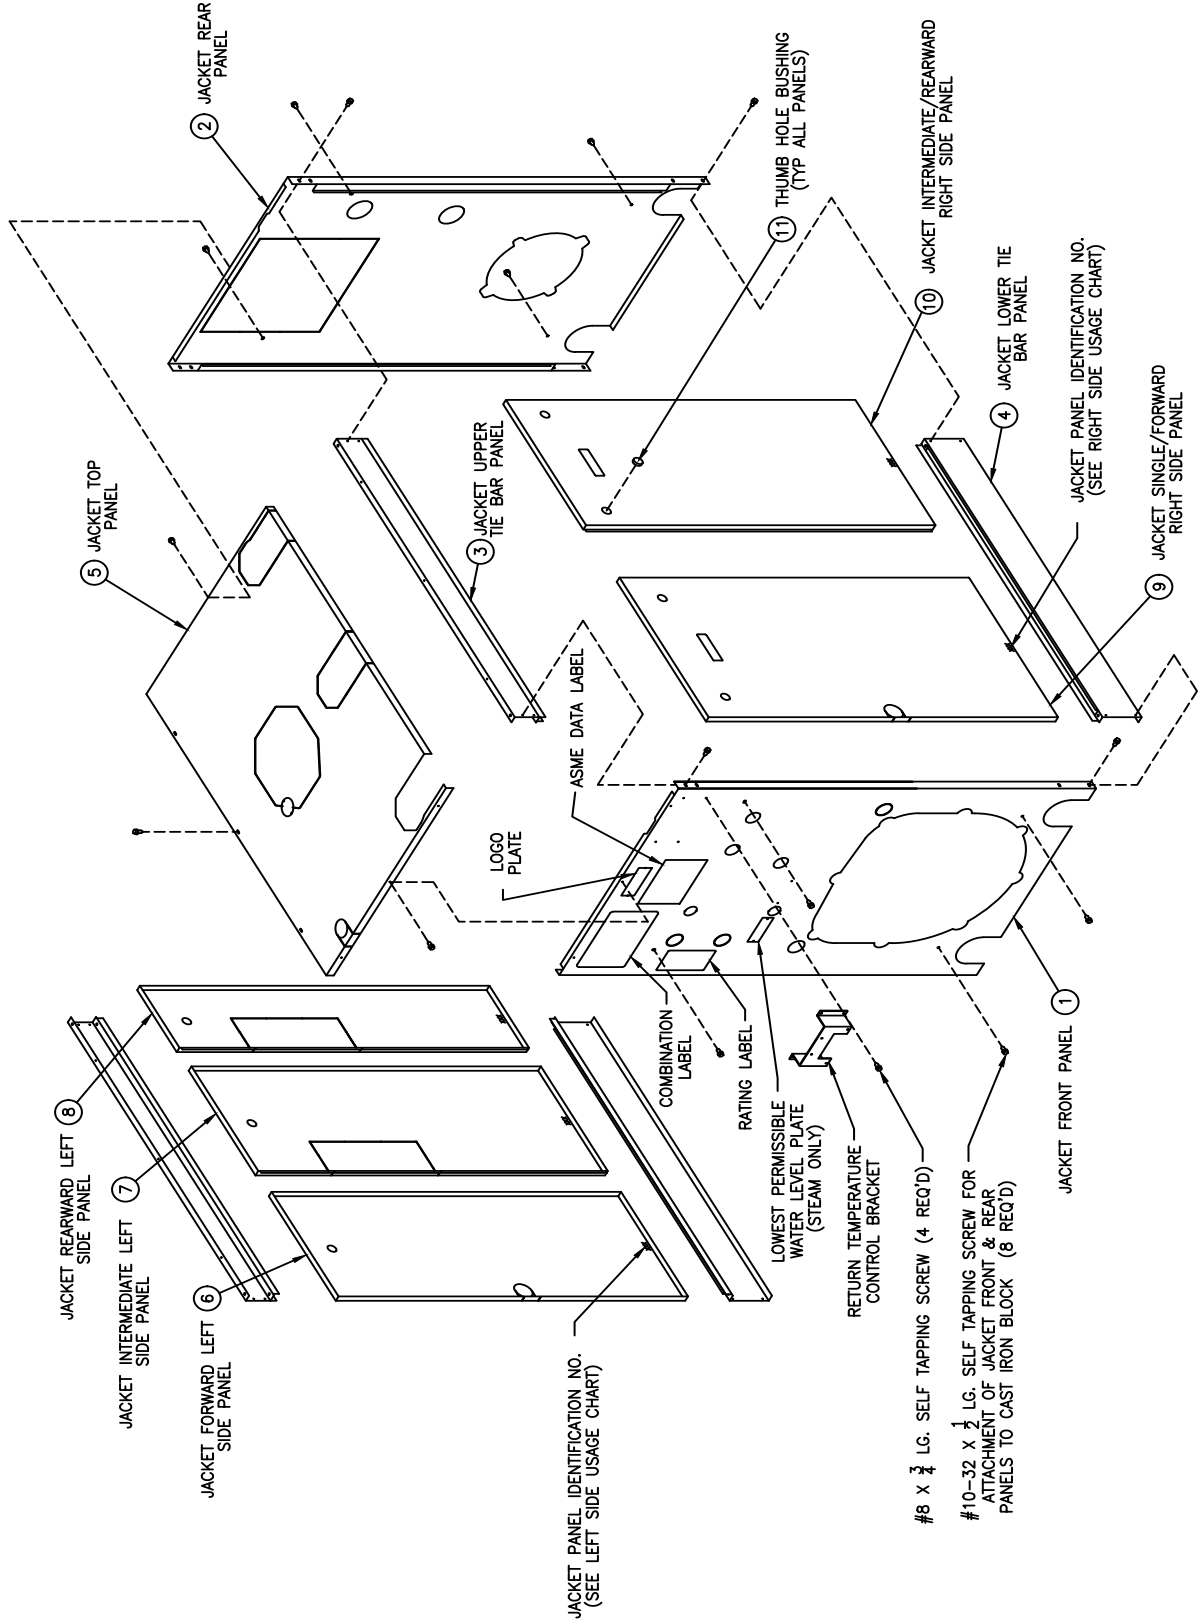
Series 25 Jacket Assembly (Boiler Models 25-03 thru 25-12)
